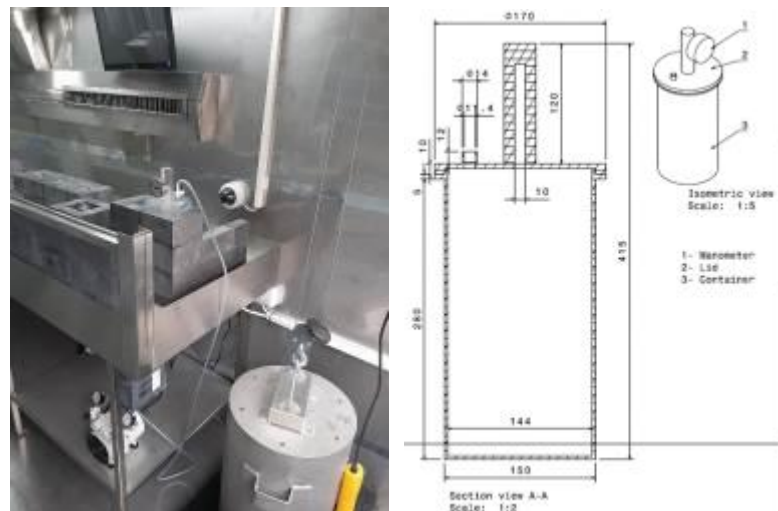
The technical drawing and photo of the equipment for testing the tightness of a welded stainless steel collection capsule „bubble test“
